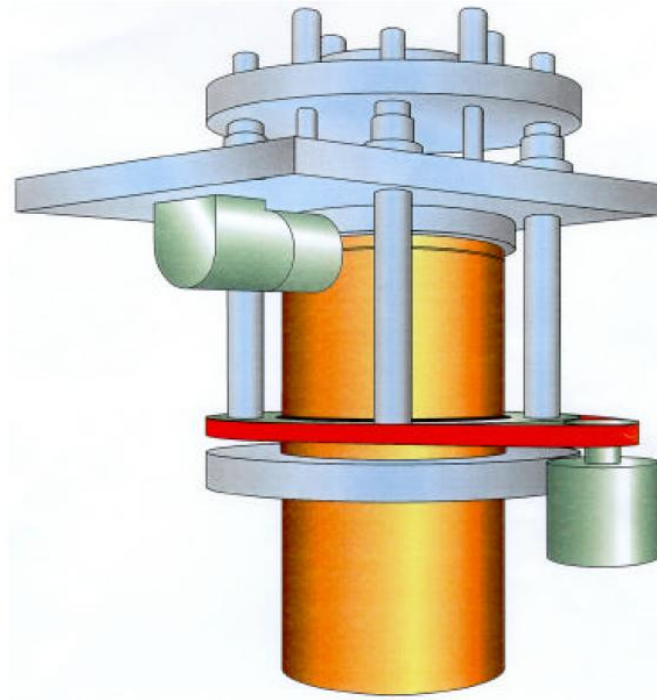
Illustration of experimental canister base welding machine (Andersson & Andrews, 1999).
